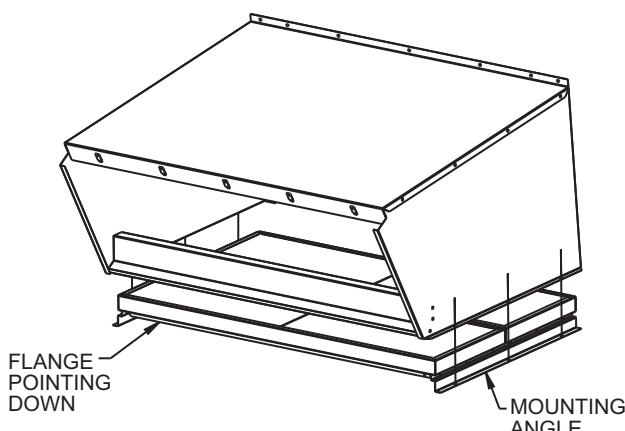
Bottom Filters Installed with Flange Pointing Down
